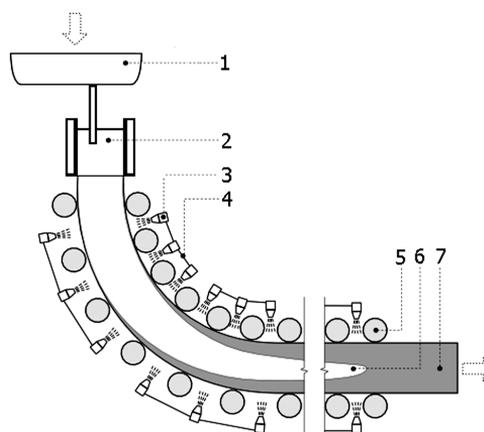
Scheme of continuous casting. 1 – tundish; 2 – mould; 3 – nozzle; 4 – coolant circuit; 5 – roller; 6 – liquid material; 7 – solid material
